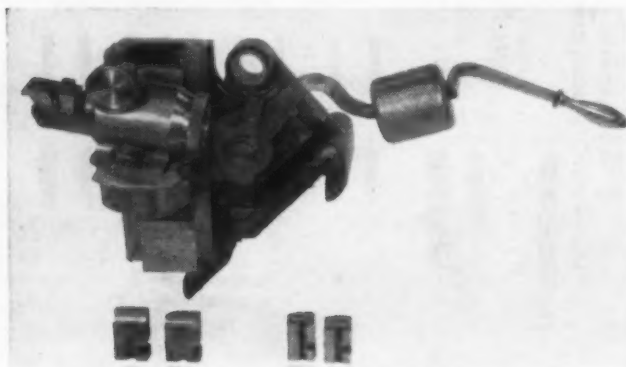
FIXTURE FOR GRINDING THREADS ON GEOMETRIC-TYPE DIES
